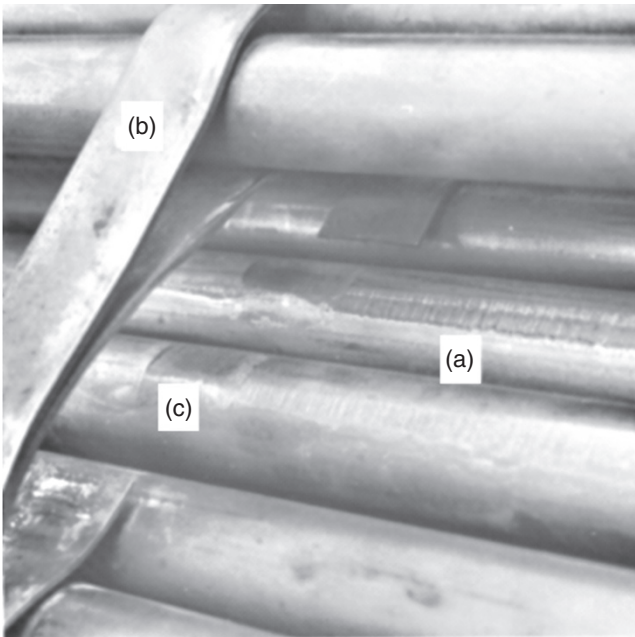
Fretting Wear in the Inlet Region of a Liquid Process Heat Exchanger: a) Tube-to-Tube Initial Damage, b) Lacing Strip, and c) Damage at Lacing Strip Location (Pettigrew, 1976).
